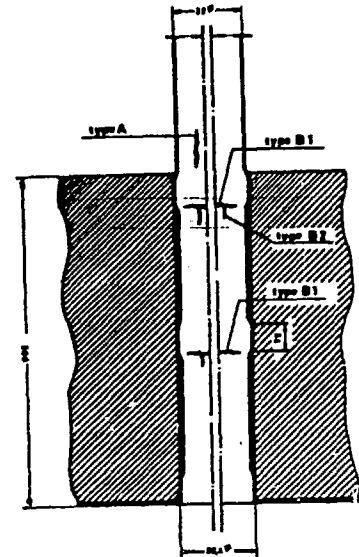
A: SCHEMATIC OF TUBE-TUBE SHEET AT OBRIGHEIM, SHOWING LOCATION OF PRIMARY SIDE SCC (TYPE B) AND SECONDARY SIDE CAUSTIC SCC (TYPE A)
